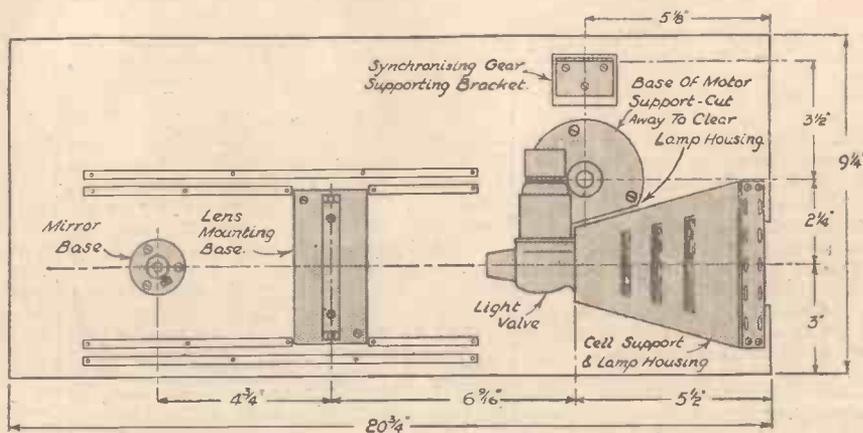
Details for mounting the respective parts on the base to maintain correct alignment.
